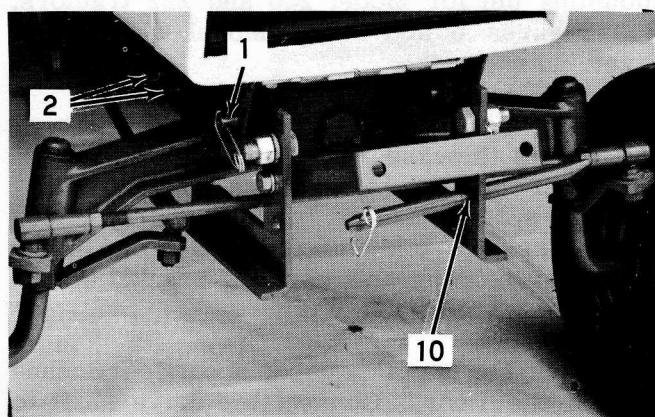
Mounting Bracket for Model 442 and 444 Tractors
